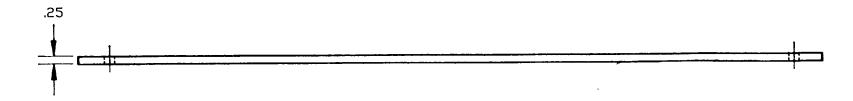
Tool Box Rack Assembly Part Number 20089720-11 (Sheet 11 of 11)
